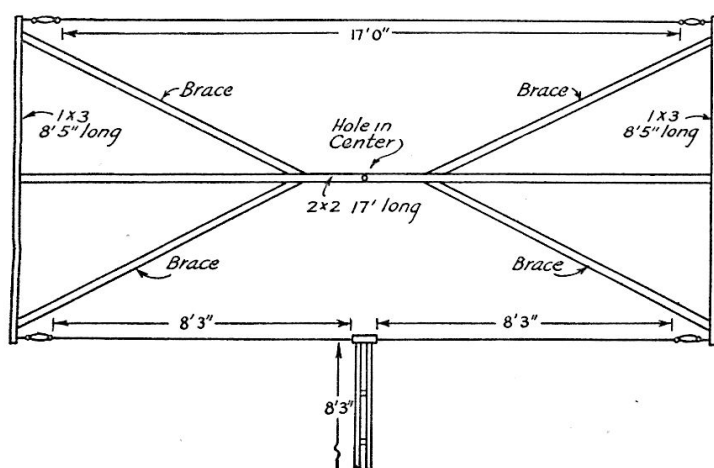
A simple frame for holding a 10-meter horizontal beam using wire elements. Dimensions can be varied to fit the element spacing desired.
